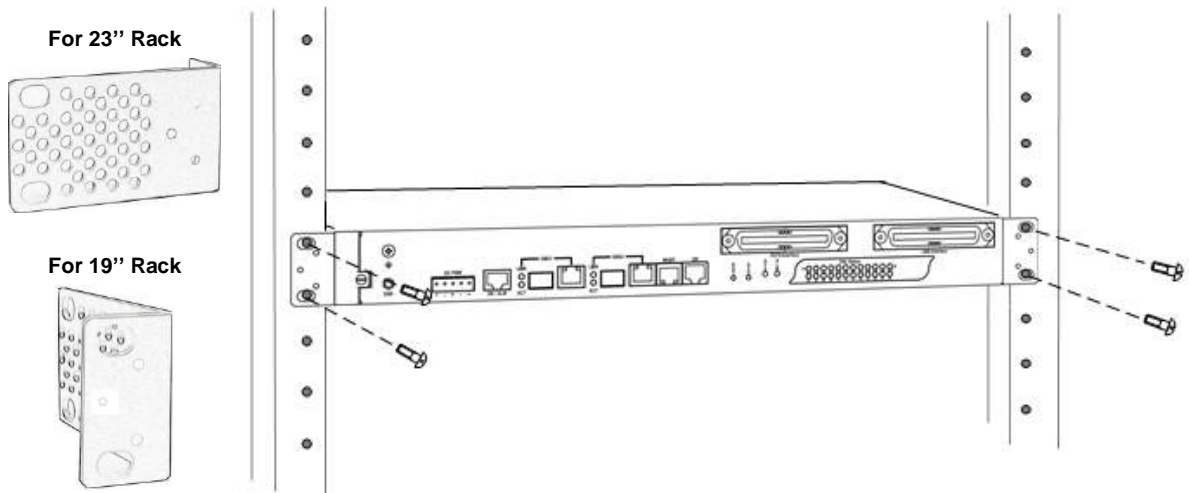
Mounting Bracket Orientation (Top View)
